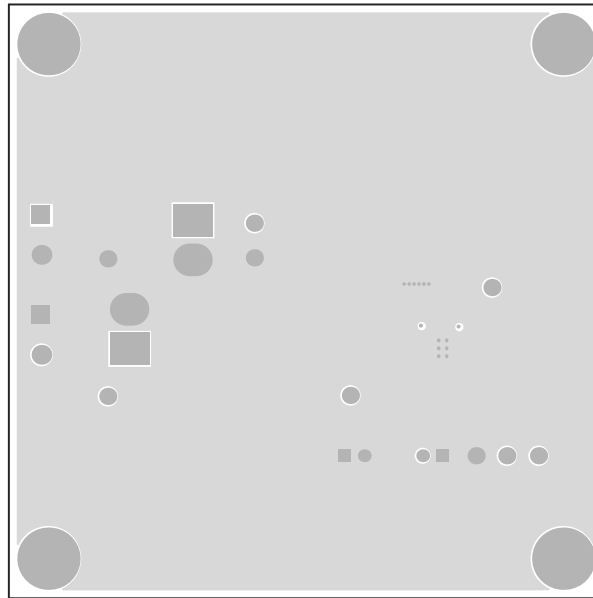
TPS54340-Q1EVM-593 Layer 2 Layout
